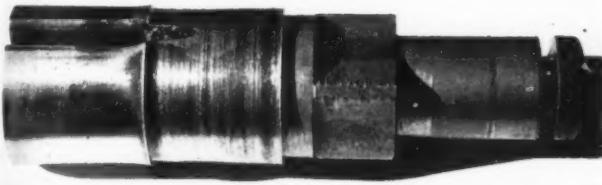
Failure of bearing surface of SAE 4140 cold-drawn steel stretcher drum is due to decarburization
